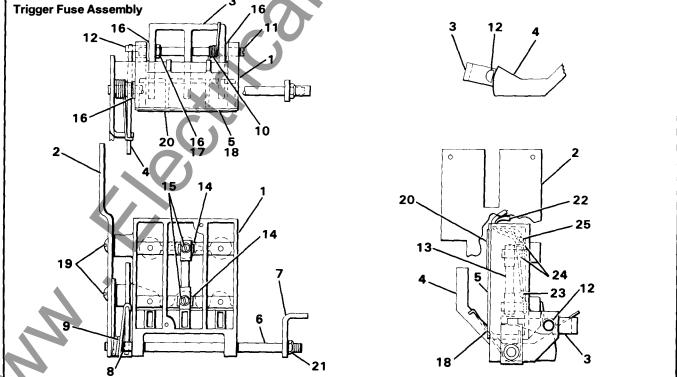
Open Fuse Trip Device, Trigger Fuse Assembly
